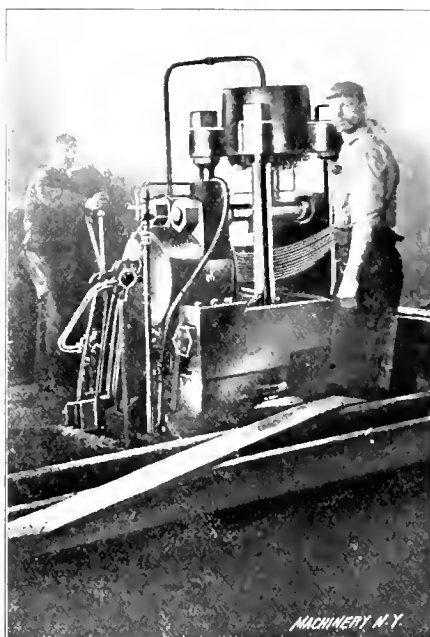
Hydraulic Press which compresses the Band on the Spring while it cools
